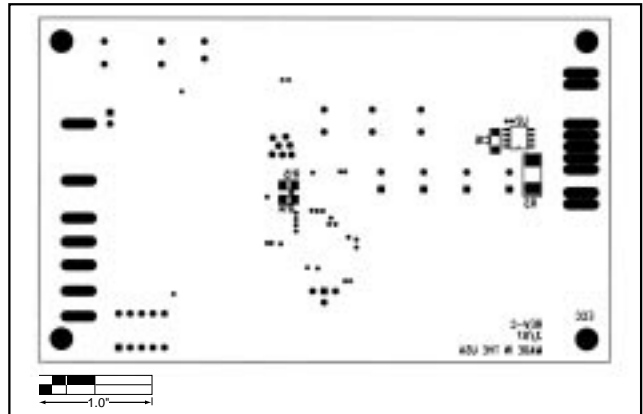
MAX1624 EV Kit Component Placement Guide—Solder Side
